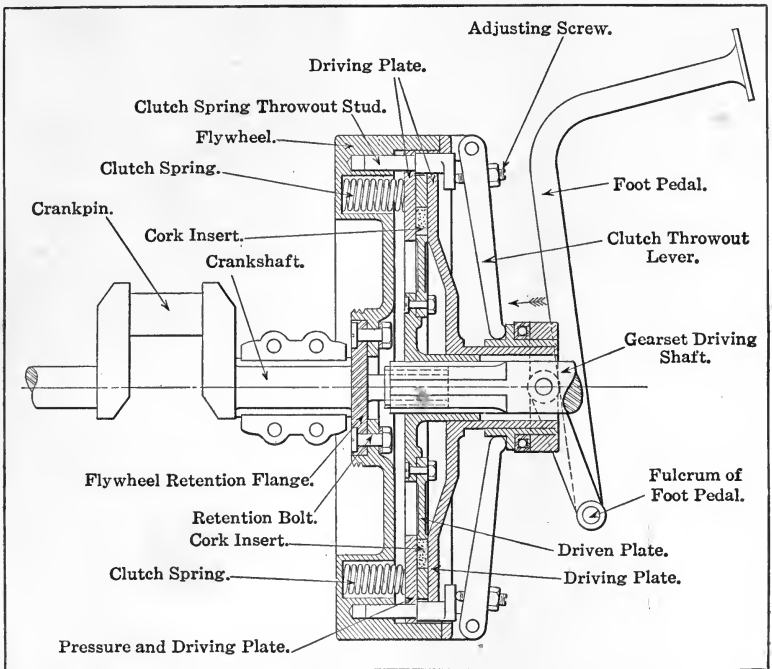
Three-Plate Clutch Utilized on Knox Motor Cars Uses a Central Driven Plate Studded with Cork Inserts.
